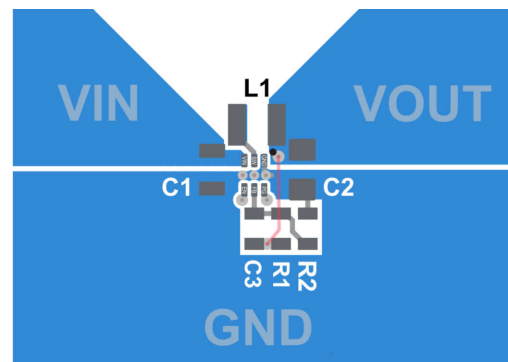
TPS62A02x-Q1 PCB Layout Recommendation
